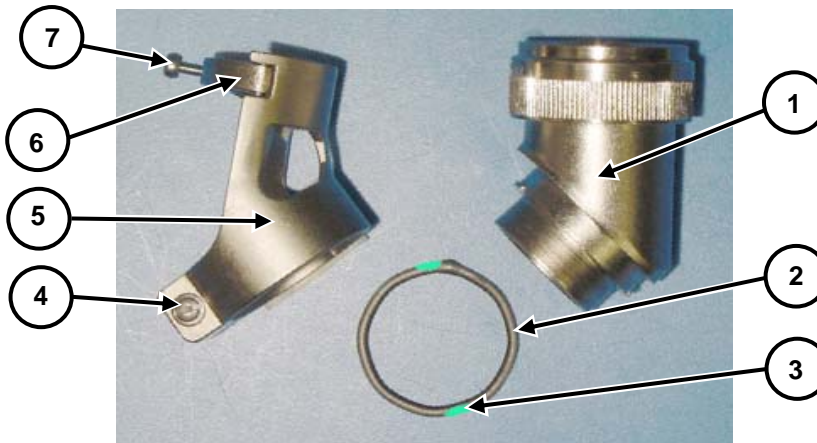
Aluminum Spin Lock Backshell Component Identifications
